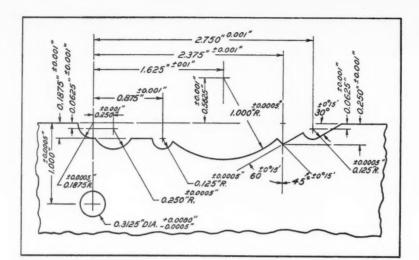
Example of the rectangular coordinate method of dimensioning a typical die form
